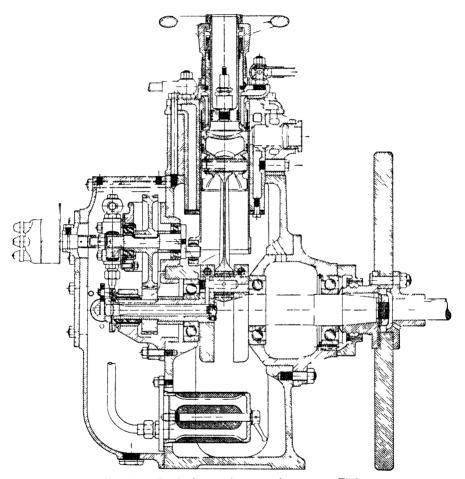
7.—Single sleeve-valve research unit, type E5/1
